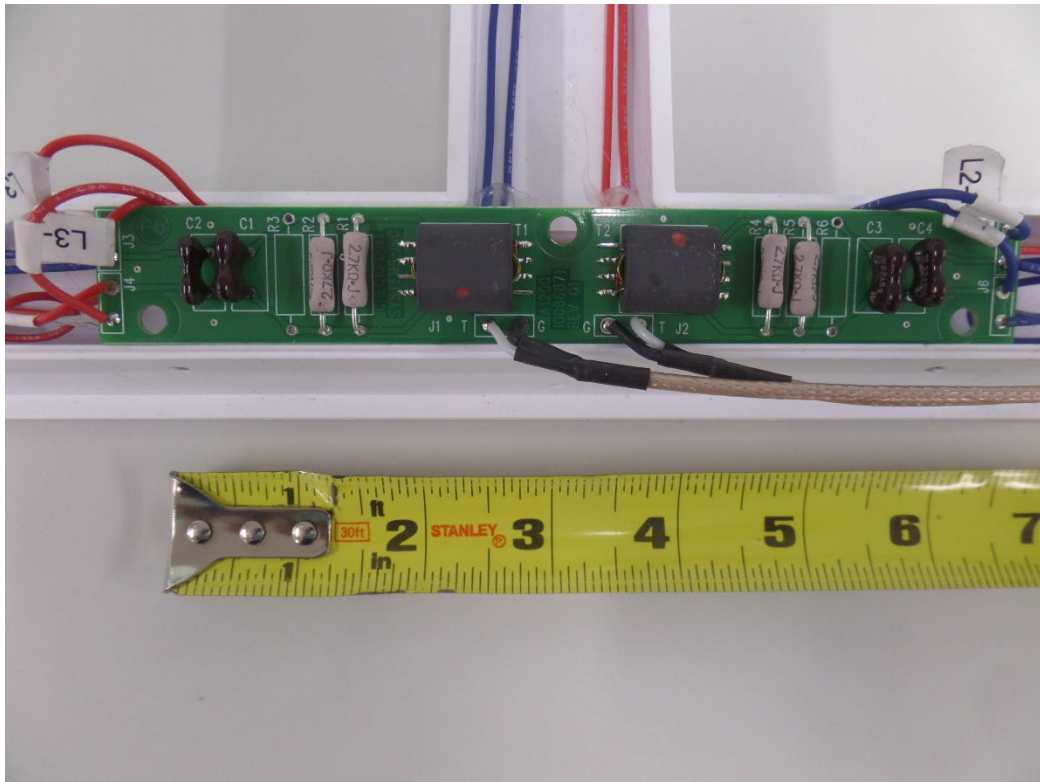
NG12 PRI/PAB RF PED MATCHING BOARD TOP SIDE
